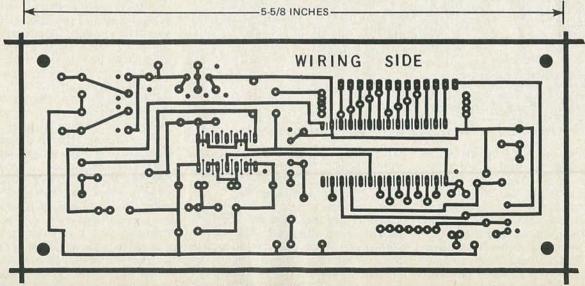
PC BOARD foil pattern. Dots in corners indicate position of mounting holes.
